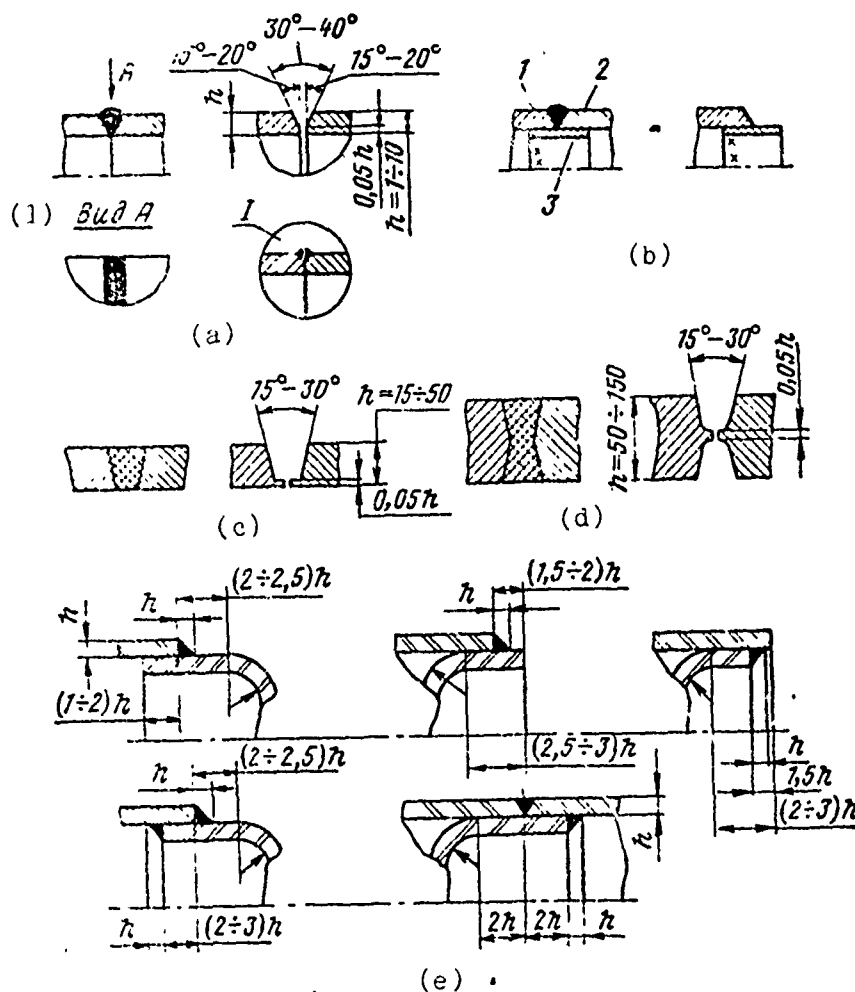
Weld seams obtained by argon-arc welding.
